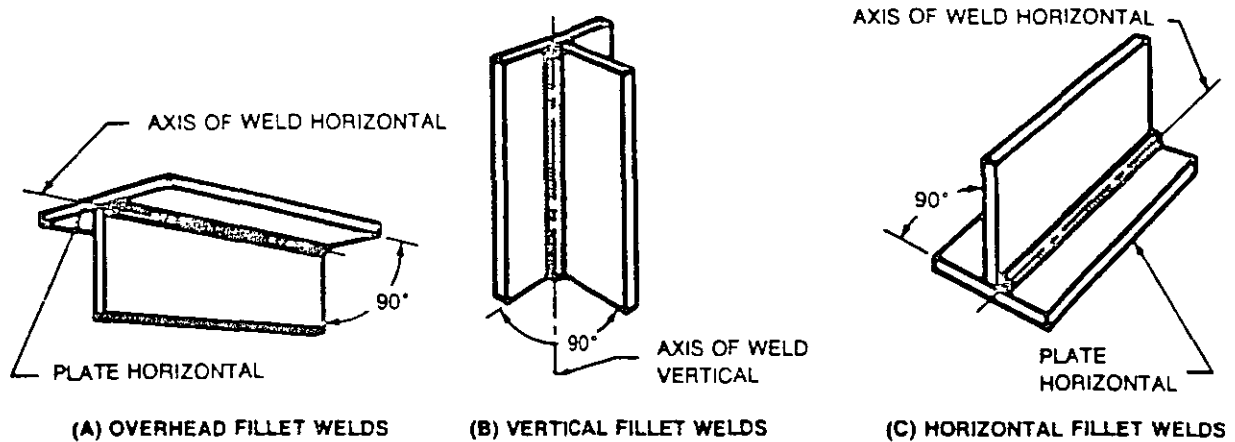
WELDING POSITIONS FOR FILLET WELD TEST ASSEMBLIES
